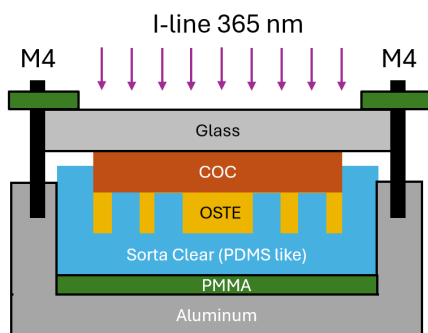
Side view schematic of jig for silicon mould fabrication. (not in scale)
